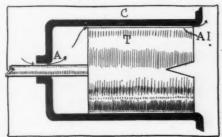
REMOVING AIR LEAK IN PISTON-TYPE THROTTLE
